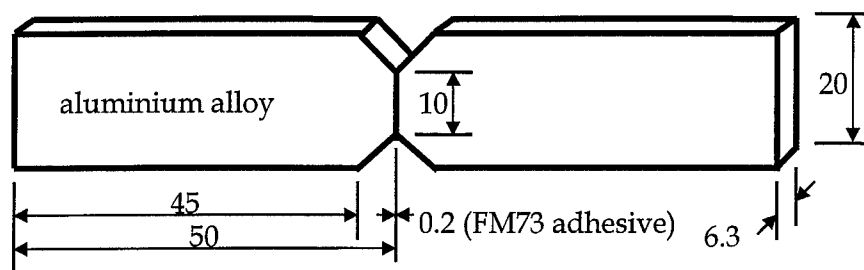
Iosipescu test specimen (All dimensions are in millimetres.)
